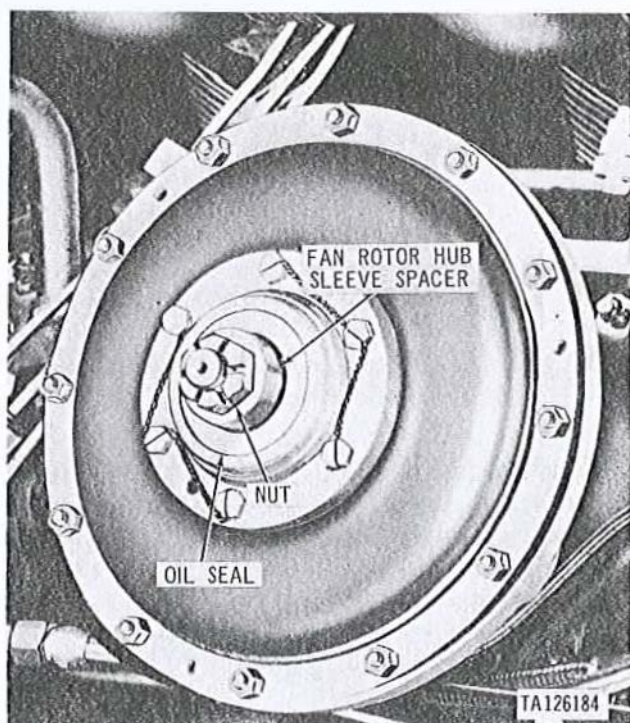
Front fan drive housing fan rotor hub sleeve spacer installed for leakage test.
